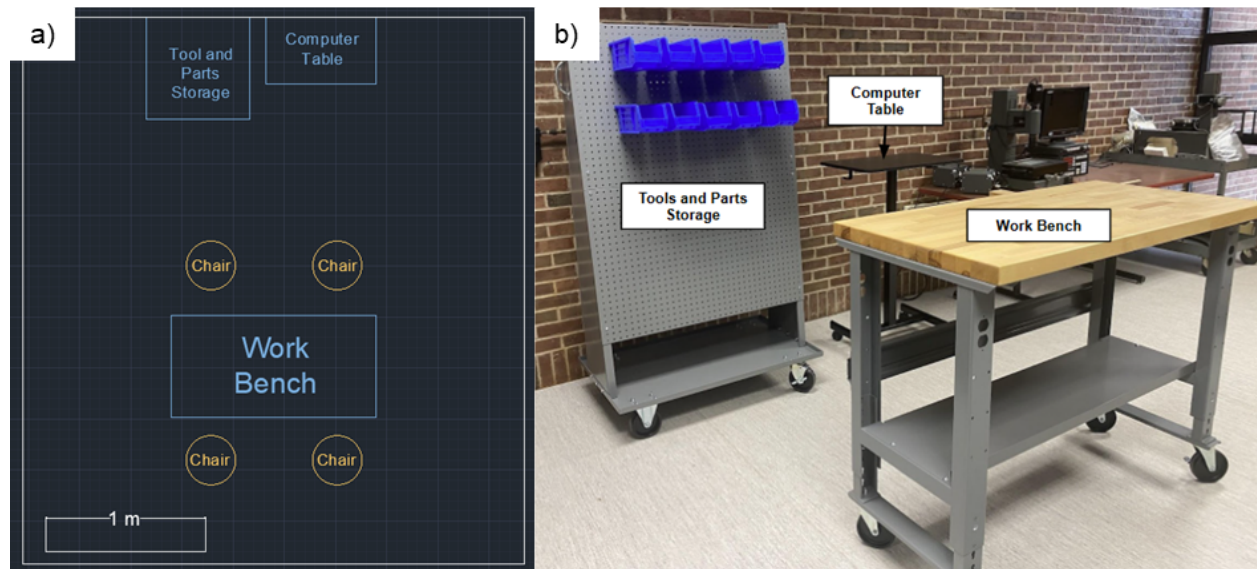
Workcell (a) AutoCAD 2D drawing and (b) physical setup.
